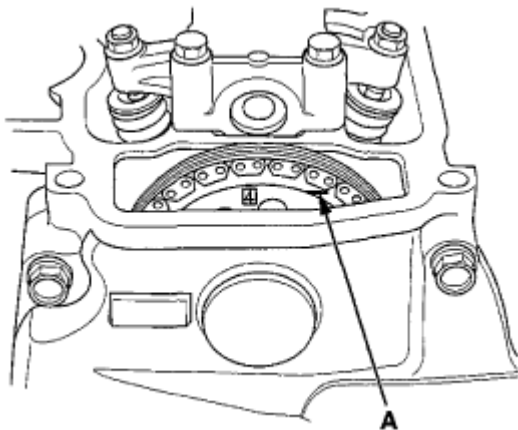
Aligning No. 4 Piston TDC Groove On Camshaft Sprocket With Top Edge Of Head
